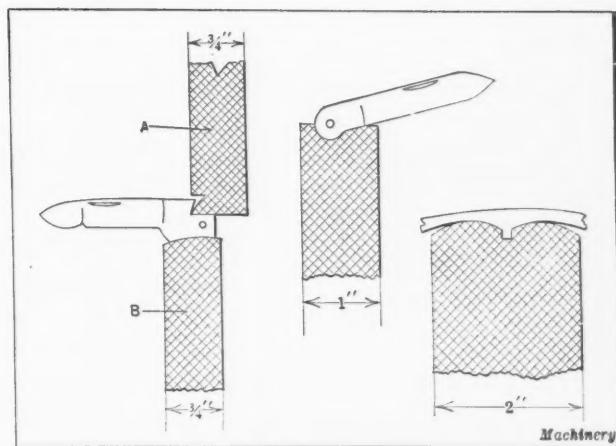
Diagrams of Formed-face Polishing Wheels for finishing Pocket Knife Blades and Springs
